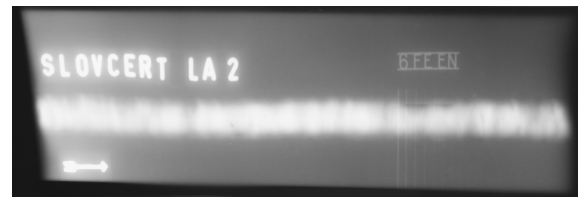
Record of weld sample No. 1 by radiography method
